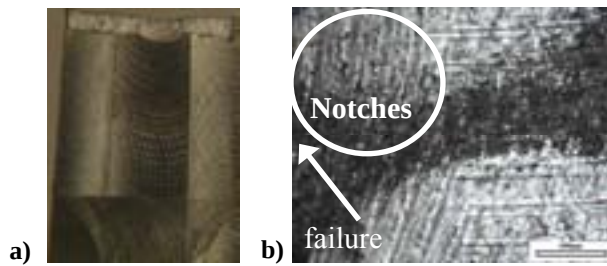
a) Failure zone of a milled specimen. The notches created by the cutting tool can be seen around the failure zone and part of the failure has taken place exactly on one of the footstep circular lines. b) A magnified view (x10) of the machined surface of a milled specimen in which small grooves caused by the cutting tool can be clearly seen (series no. 9, $r = 2$).
